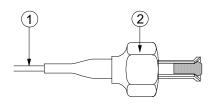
Style 45A (incl. valve depressor mounted into flare)
